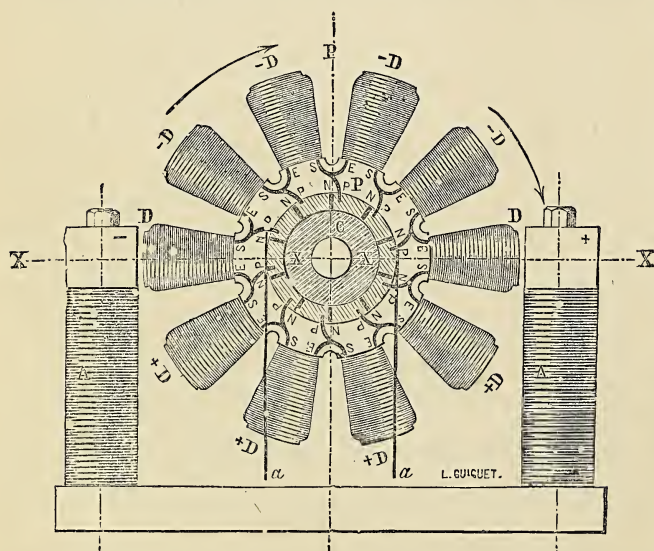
Lontin's Magneto-electric Exciting Machine, sectional view.
